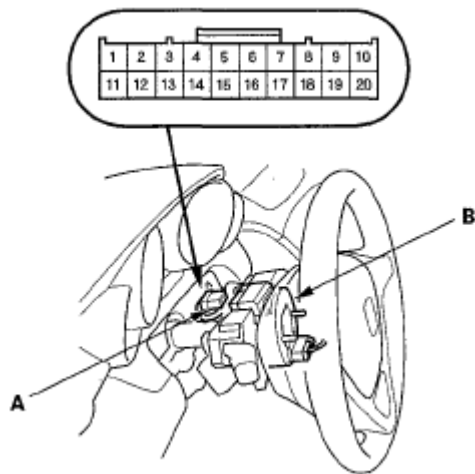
Identifying Dashboard Wire Harness 20P Connector And Cable Reel
